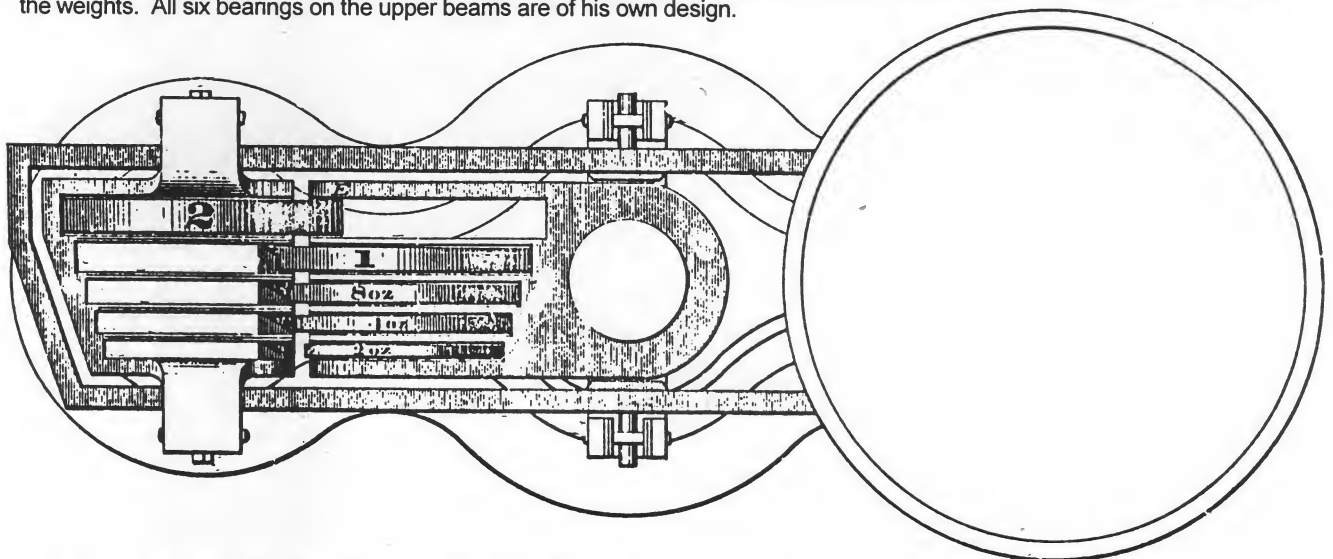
^^ A plan view of Farnum's patent showing the diminishing size of the weights in their rack. Note the eccentric shape of the beam as it skirts the end of the cradle.
